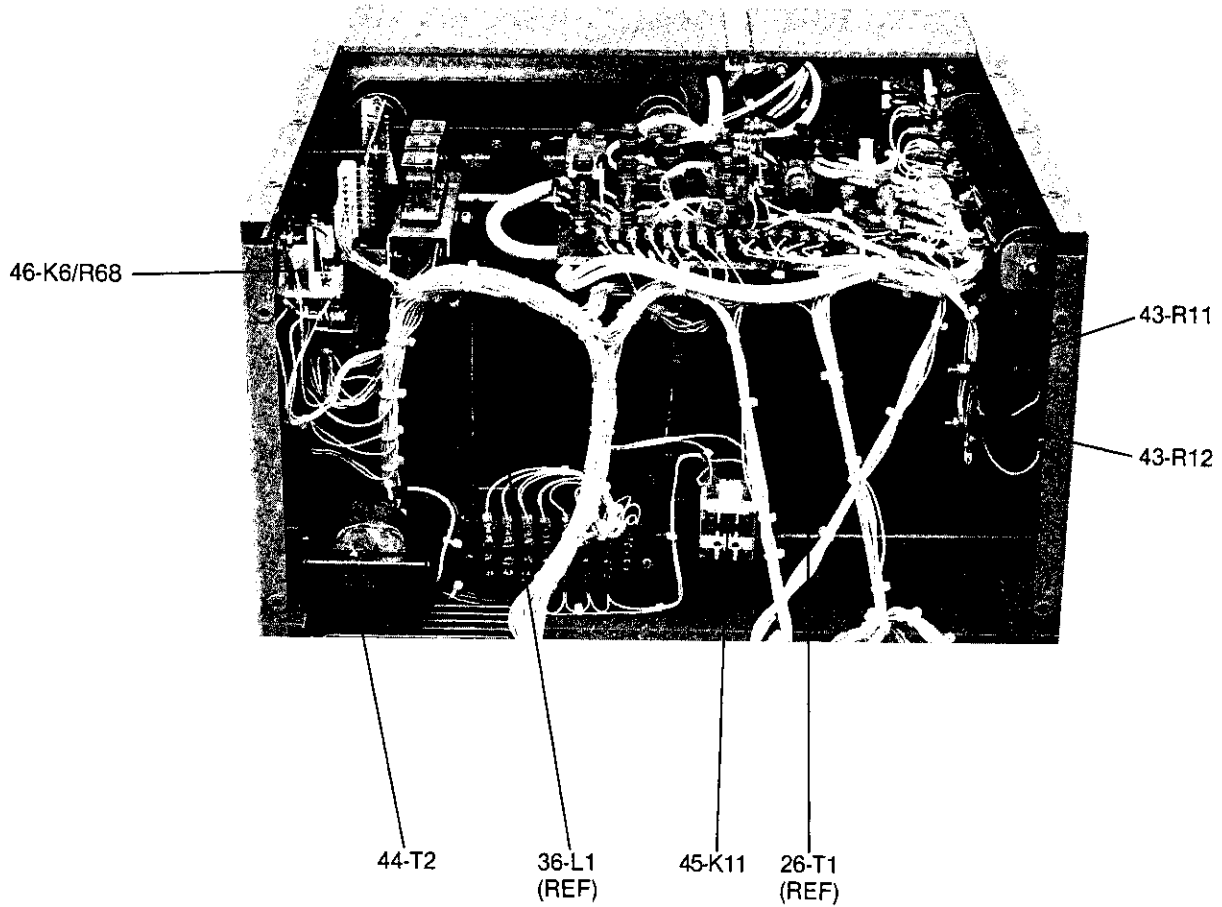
Replaceable Parts-Main Assembly (Sheet 3 of 4)
